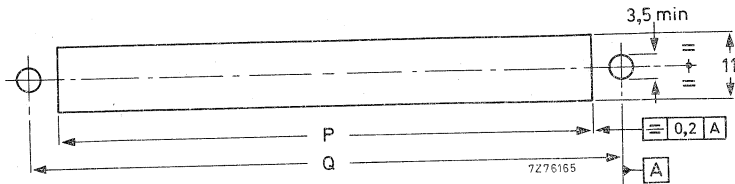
Panel cut-out; see Table 3 for dimensions P and Q.
